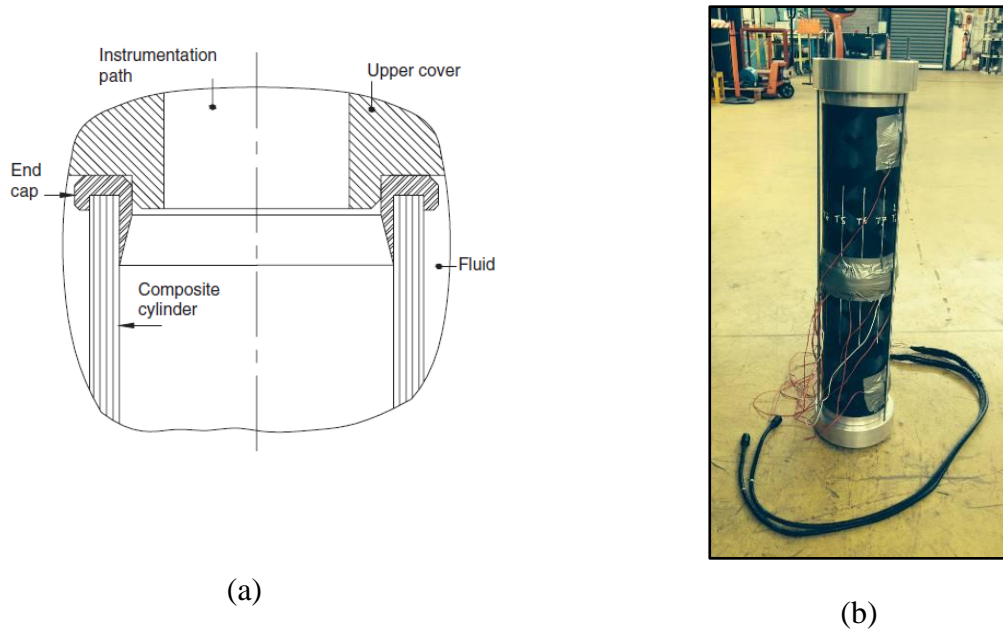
(a) Experimental end fixtures for implosion tests (b) Cylinder ready for implosion test
